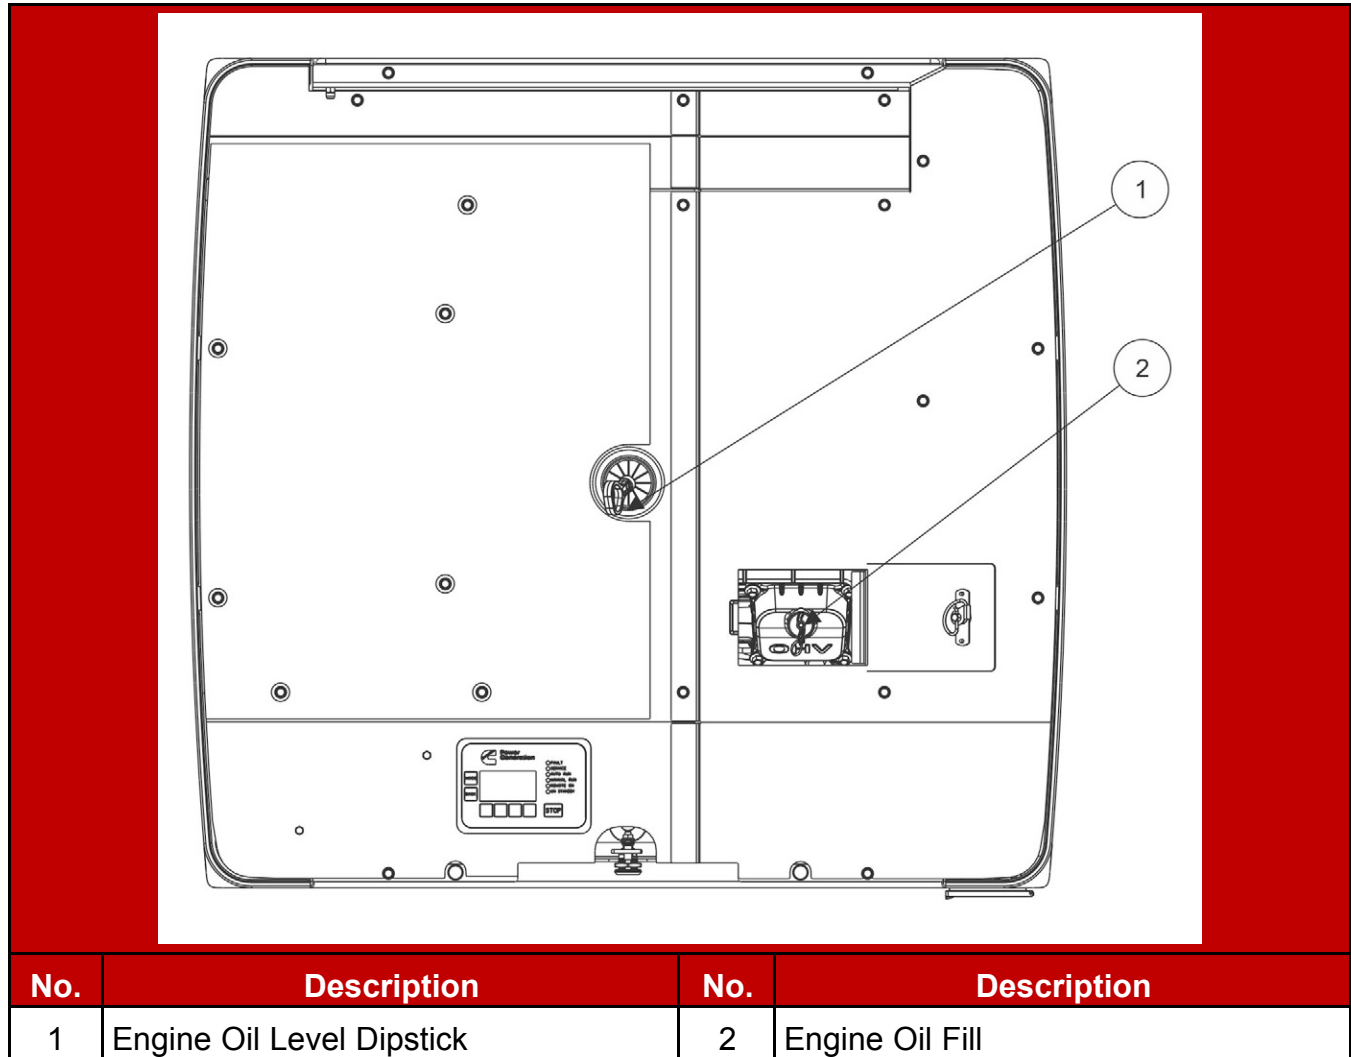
ENGINE OIL COMPONENTS (TOP VIEW)
